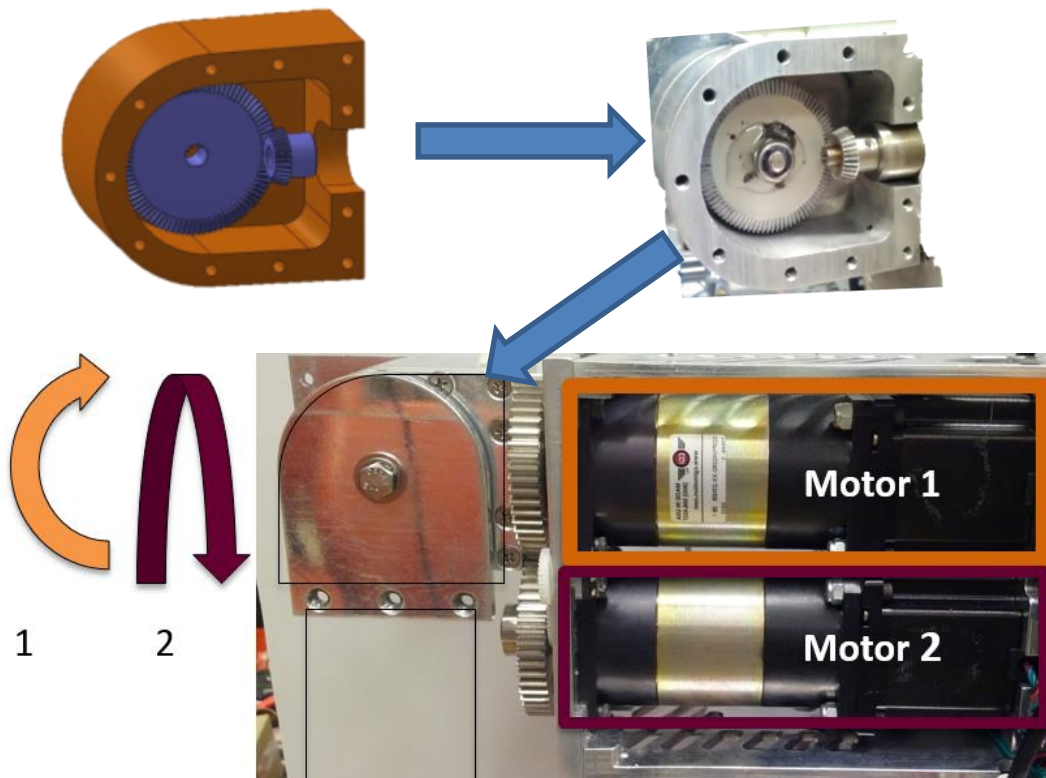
CAD design of the shoulder assembly, with a view of the internal gear system in the shoulder. The diagram details the layout of the motors in the chest that enable the abduction and flexion motions accomplished by their respective motors 1 and 2.
